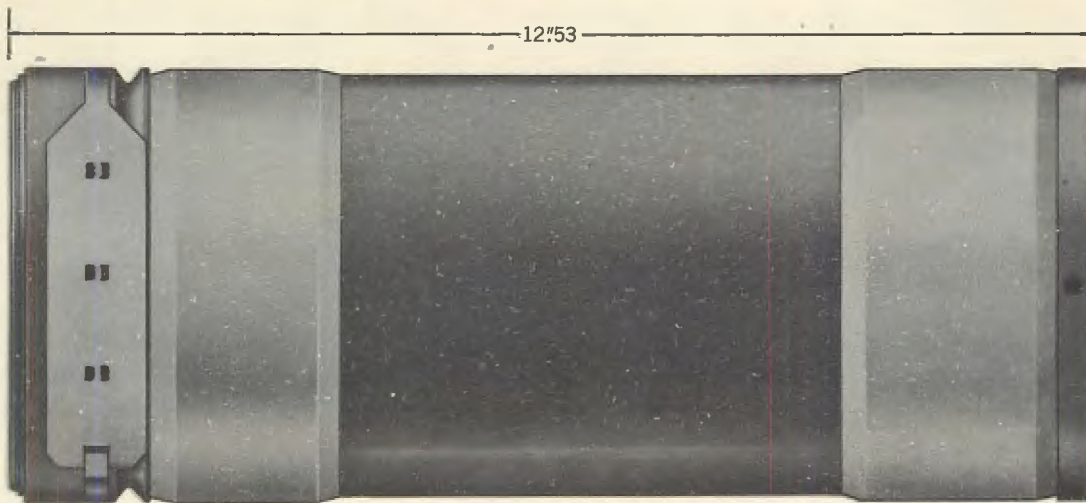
5.0-Inch Rocket Motor Mk 5 Mod 4, External View.
